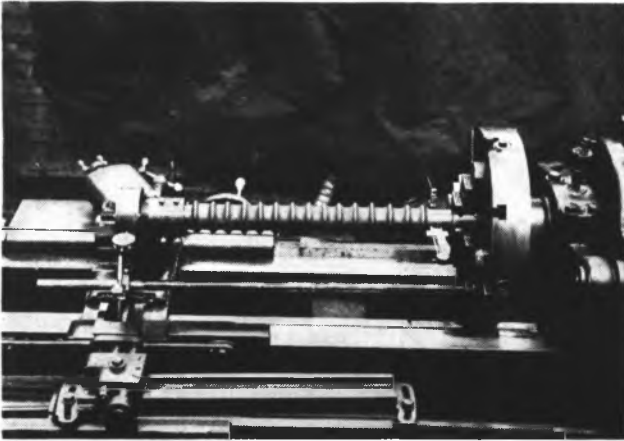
CORRUGATED TANGENT MOUNTED IN THE LATHE FOR GAGING STRESS AND DEFLECTION PRIOR TO FATIGUE TEST
